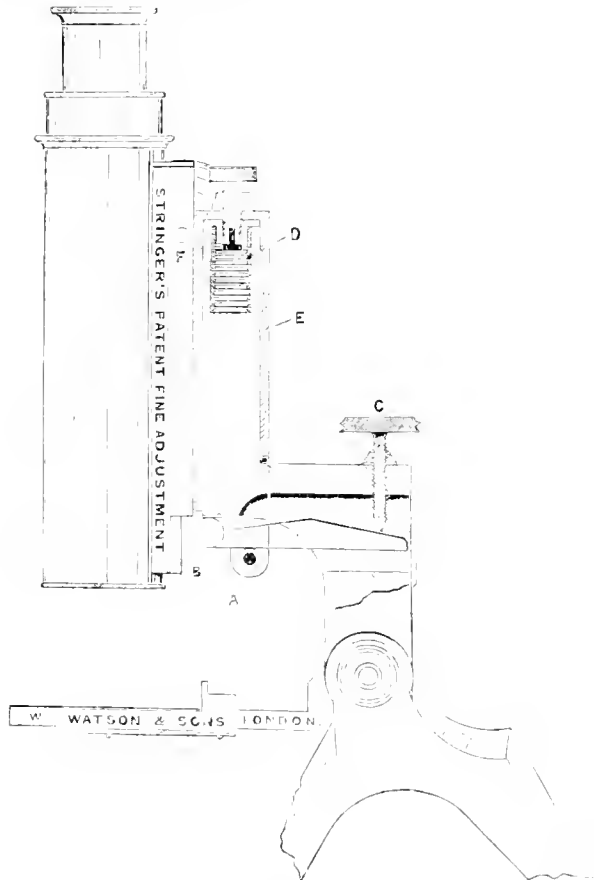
Sectional View of Stringer's Patent Fine Adjustment. An examination of the drawings showing the cross section of
